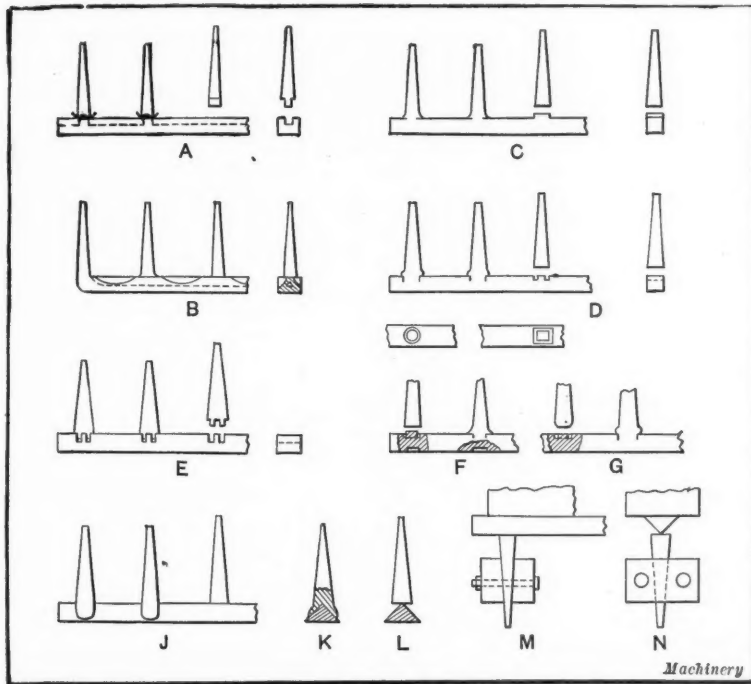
Diagram illustrating Principles used in employing Process known as "T-welding" with Special Application to the Manufacture of Garden Rakes
